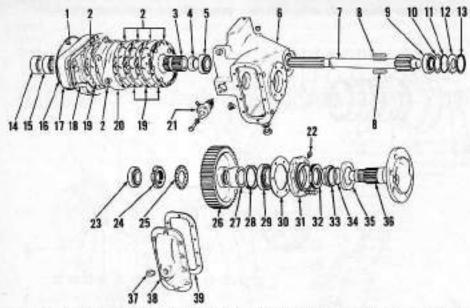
Exploded view of Model 1490 final drive showing component parts and their relative positions.
